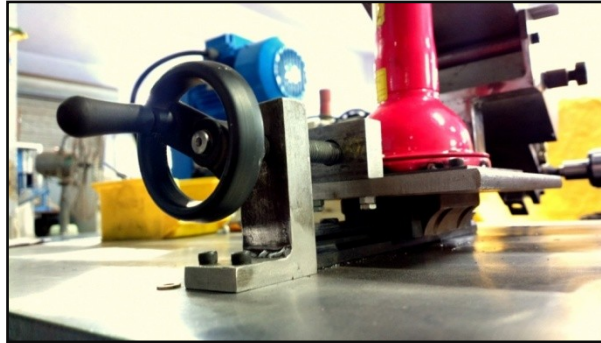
Actual Photograph of Y-Axis Mechanism
